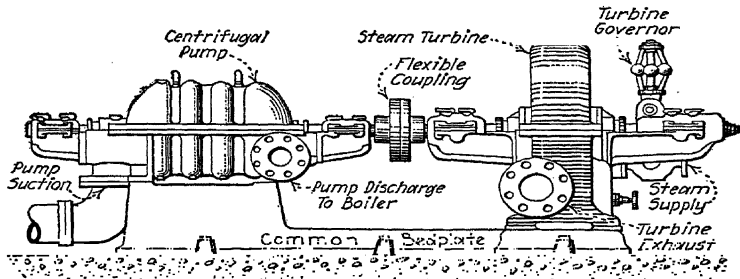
Centrifugal boiler-feed pump driven by a non-condensing steam turbine.
